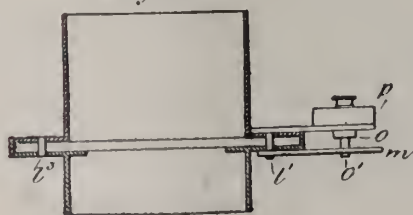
is a front view of the shutter when fully open, the front plate being removed.
